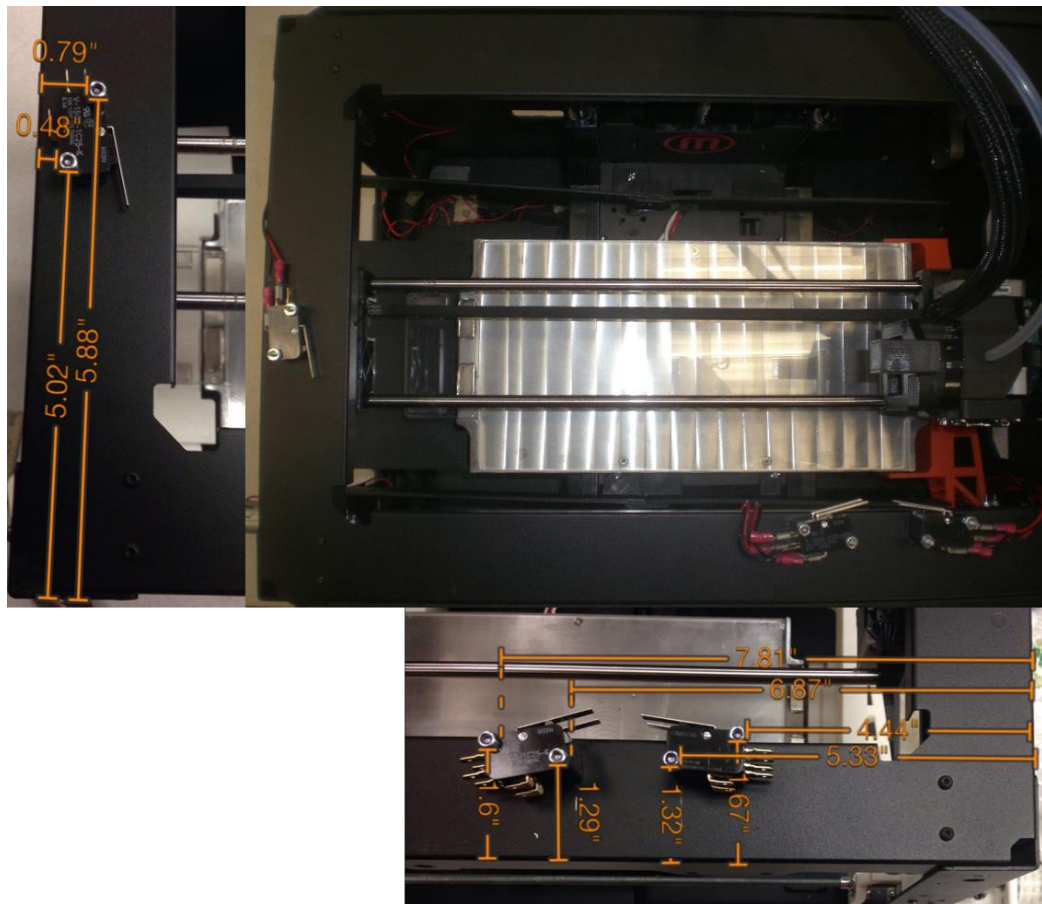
The top right picture shows the 3D printer as seen from the top and the locations of limit switches. The 2 adjoining pictures specify the placement of the holes. All dimensions are to the center of the holes.
